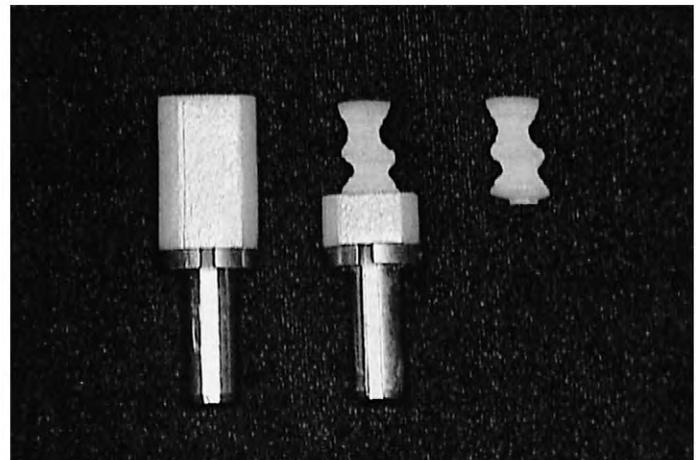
(Left) CAD-CAM ceramic block before milling. (Center) An intermediate stage of milling. (Right) After removal of the inlay from the mounting stub.
